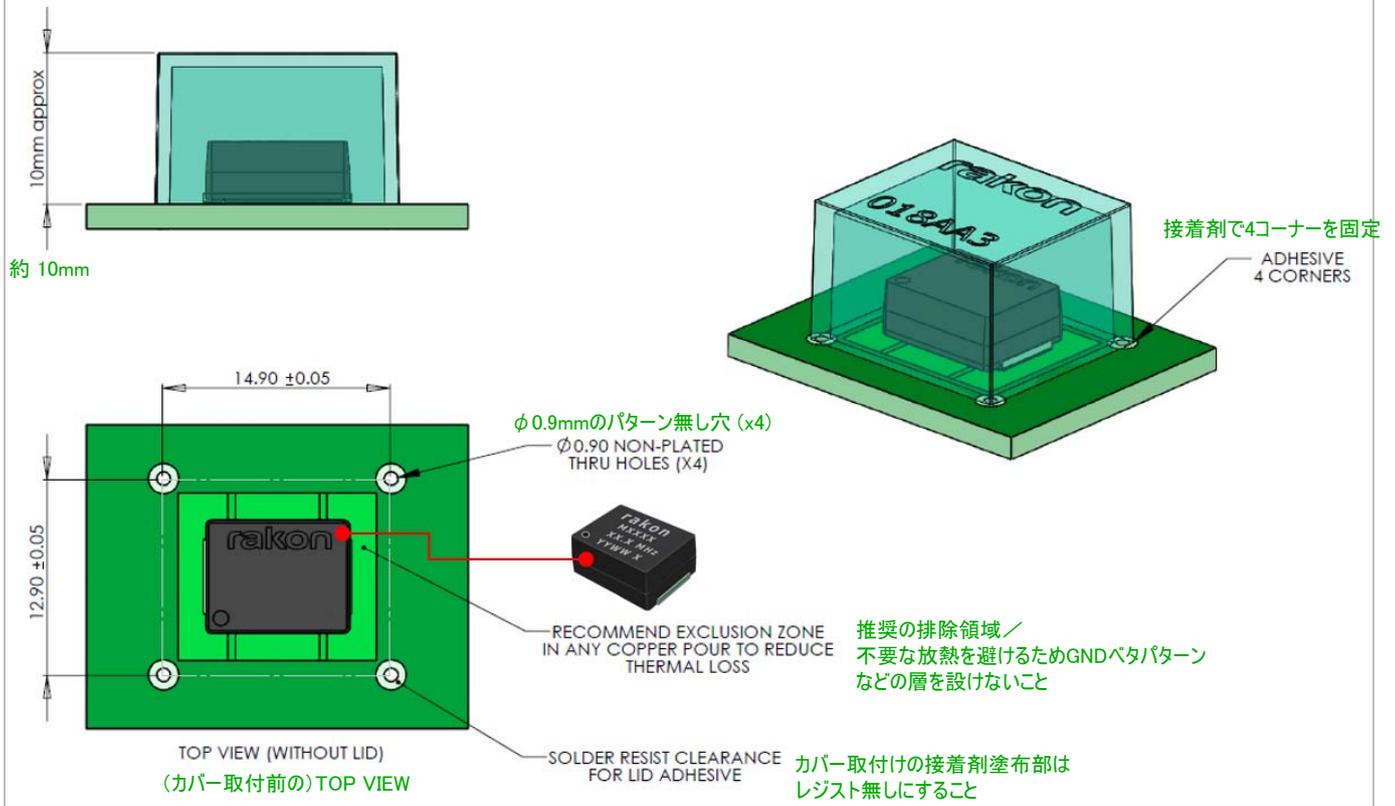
RFPO50 / RFPO55 / ROM1490xx Cover Outline Drawing
